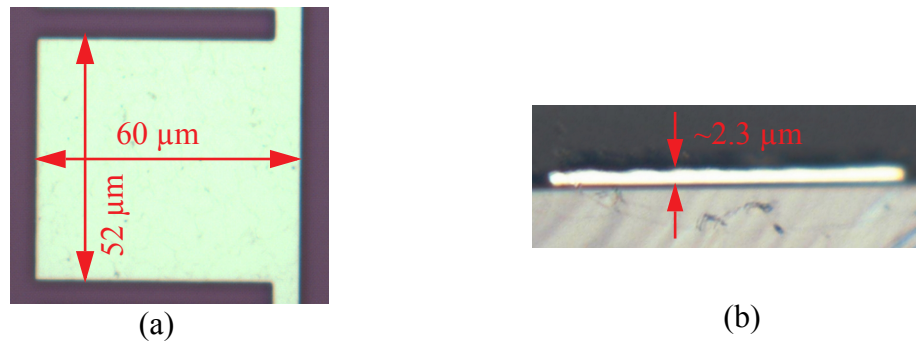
Micrographs of a typical ball bond pad, (a) top view with dimensions and (b) cross section showing pad thickness. The adjacent pad centers are $60 \mu\text{m}$ apart.
